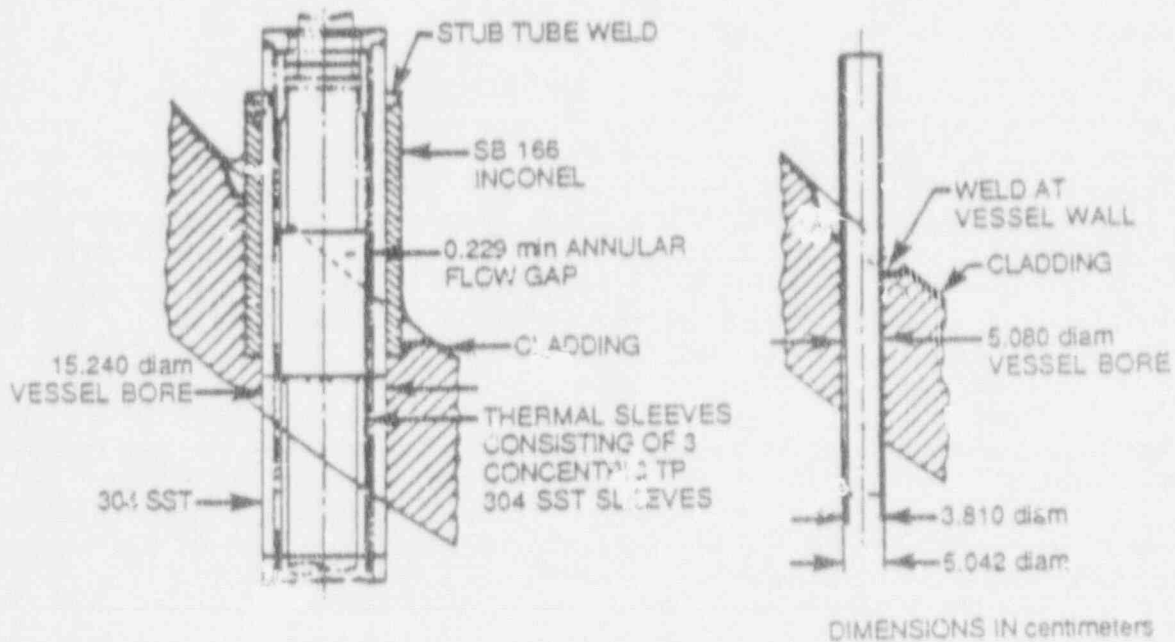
The BWR control rod drive mechanism assemblies are held in place by stainless steel-to-Inconel welds at the upper ends of the stub tubes, whereas the in-core instrument tubes are supported by stainless steel-to-Inconel welds at the vessel wall.
